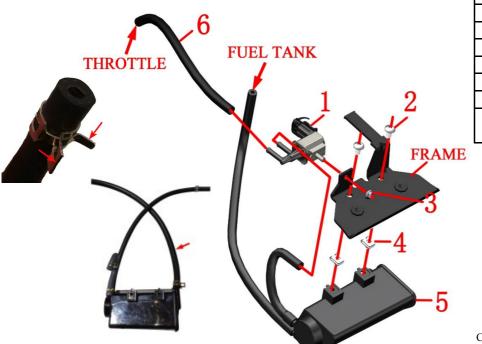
IN	TAKE SYSTEM	Canister assembly	CHK	( <b>0</b> )
